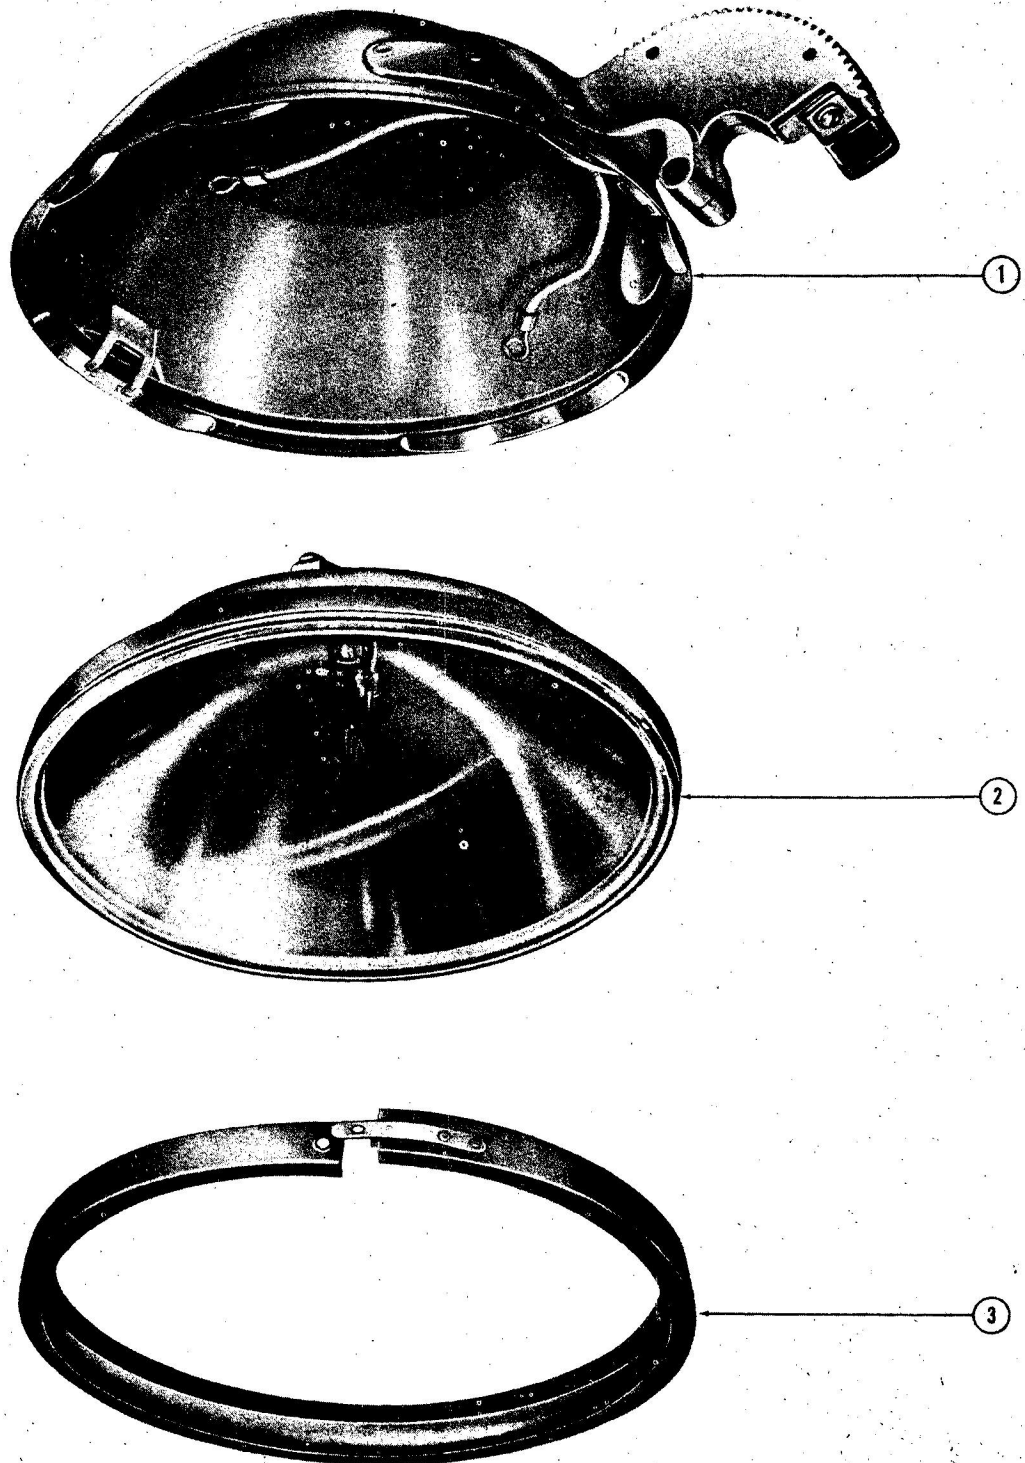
Exploded View of Inner Shell and Lamp Assembly
